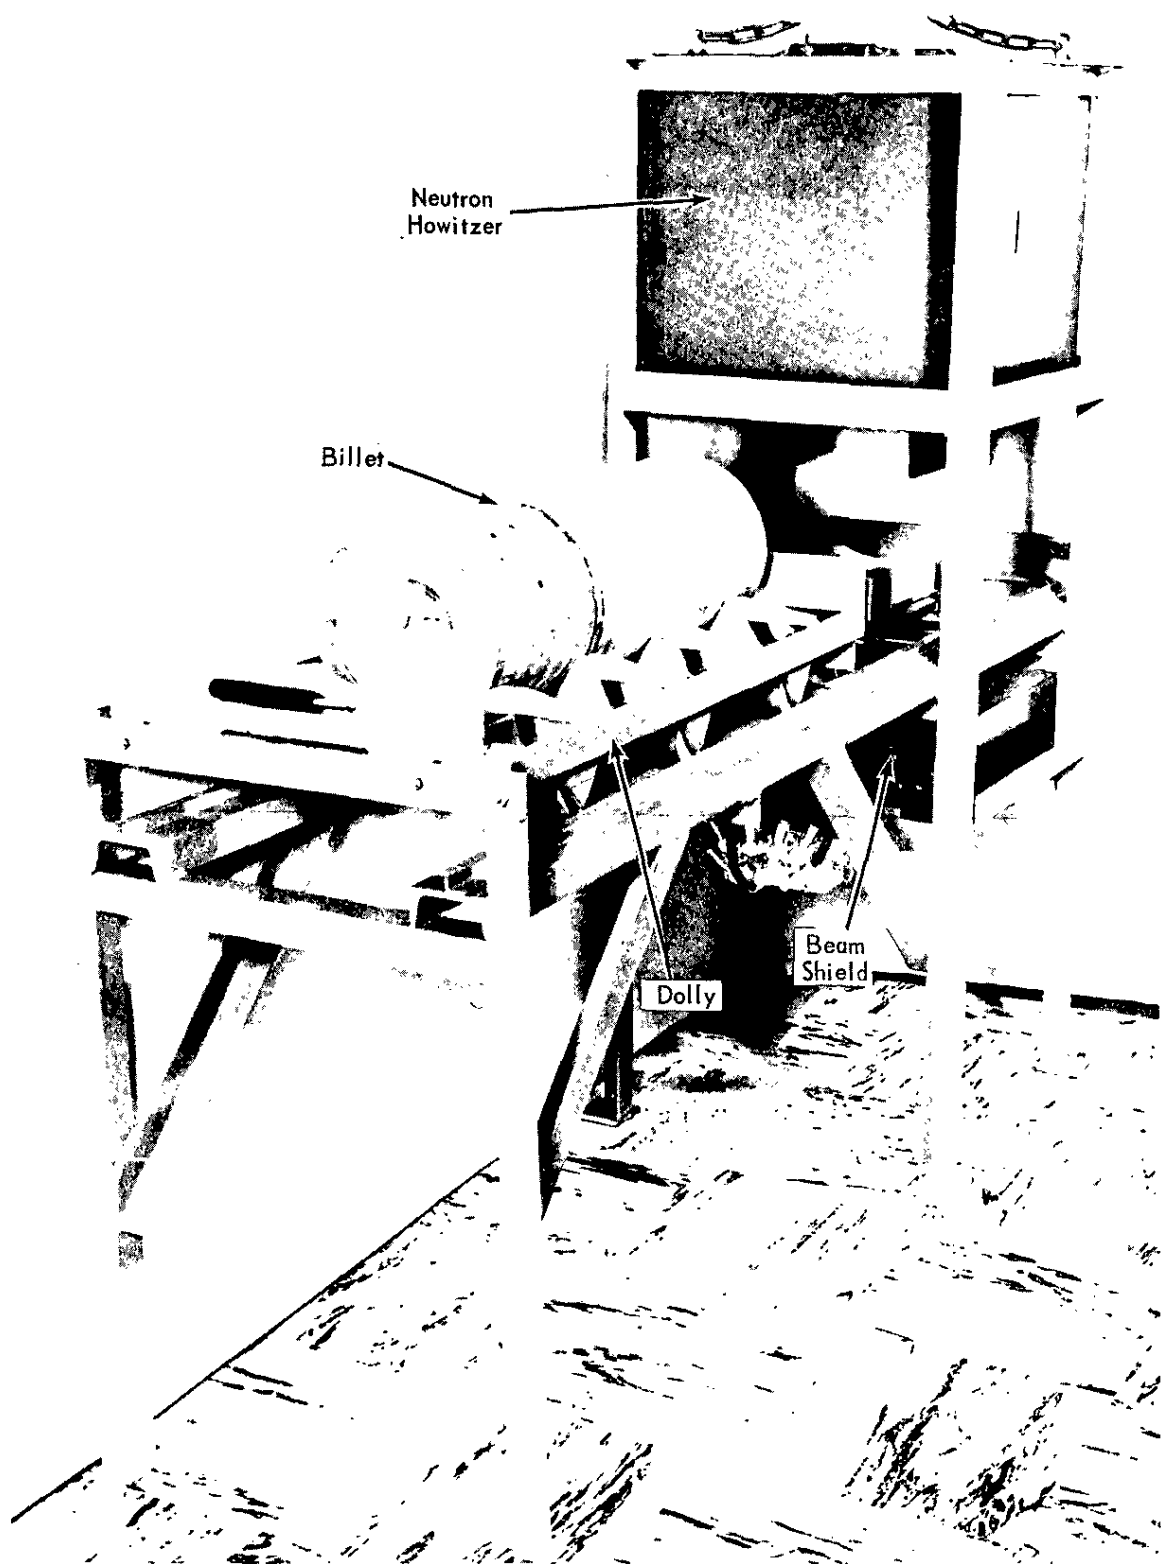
SIDE VIEW OF ASSEMBLED BILLET TESTER
